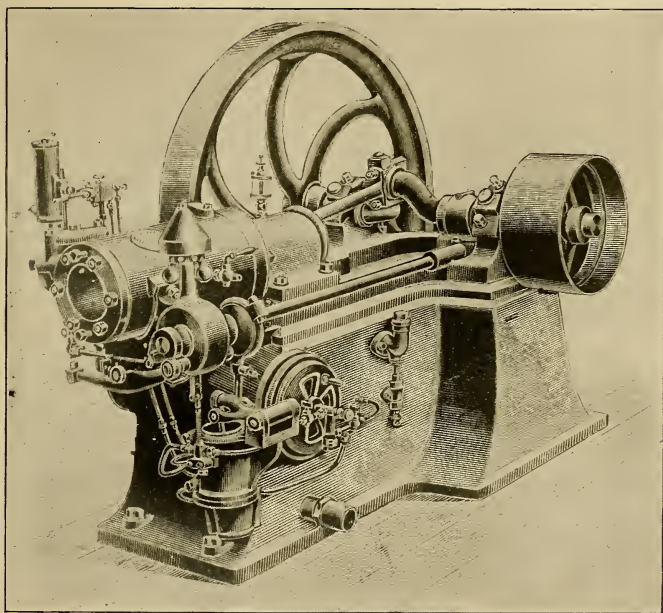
FIG. II.—THE GRIFFIN OIL ENGINE, CONSTRUCTED BY MESSRS. GRIFFIN & CO., BATH, ENGLAND.
